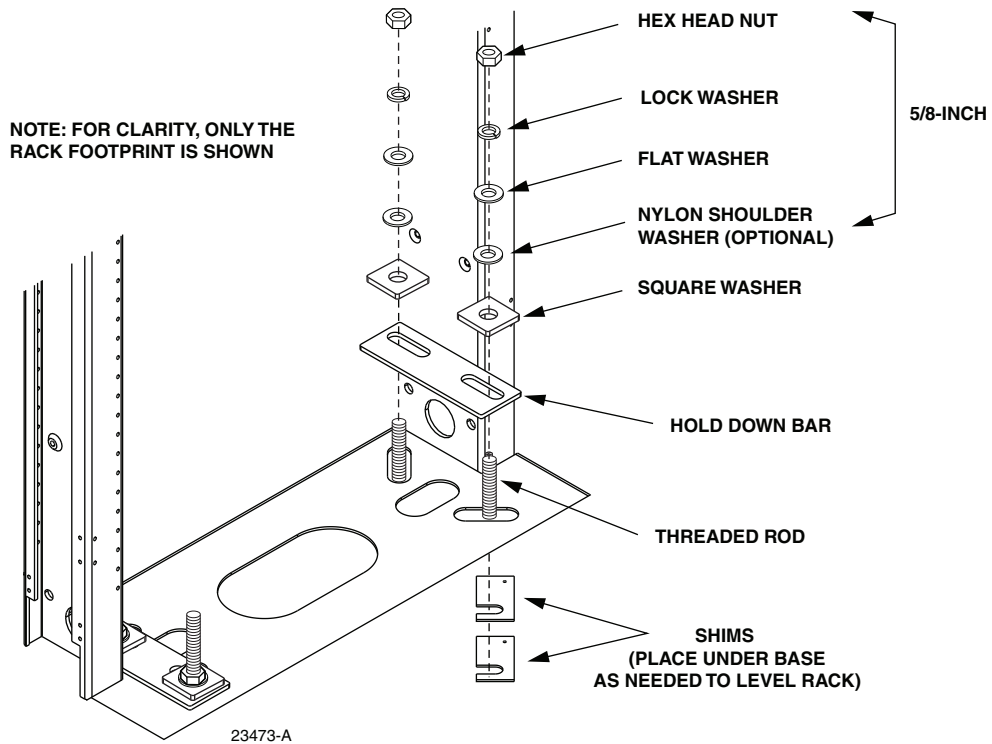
Tighten Nuts At The Bottom Of Each Threaded Rod
